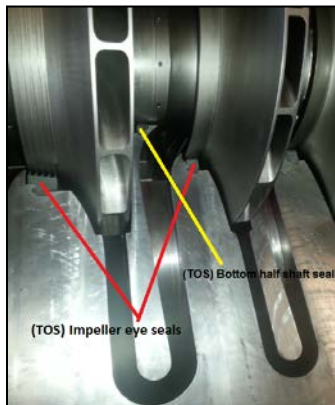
6 Teeth on Stator (TOS) configuration (shaft seal & impeller seal).
